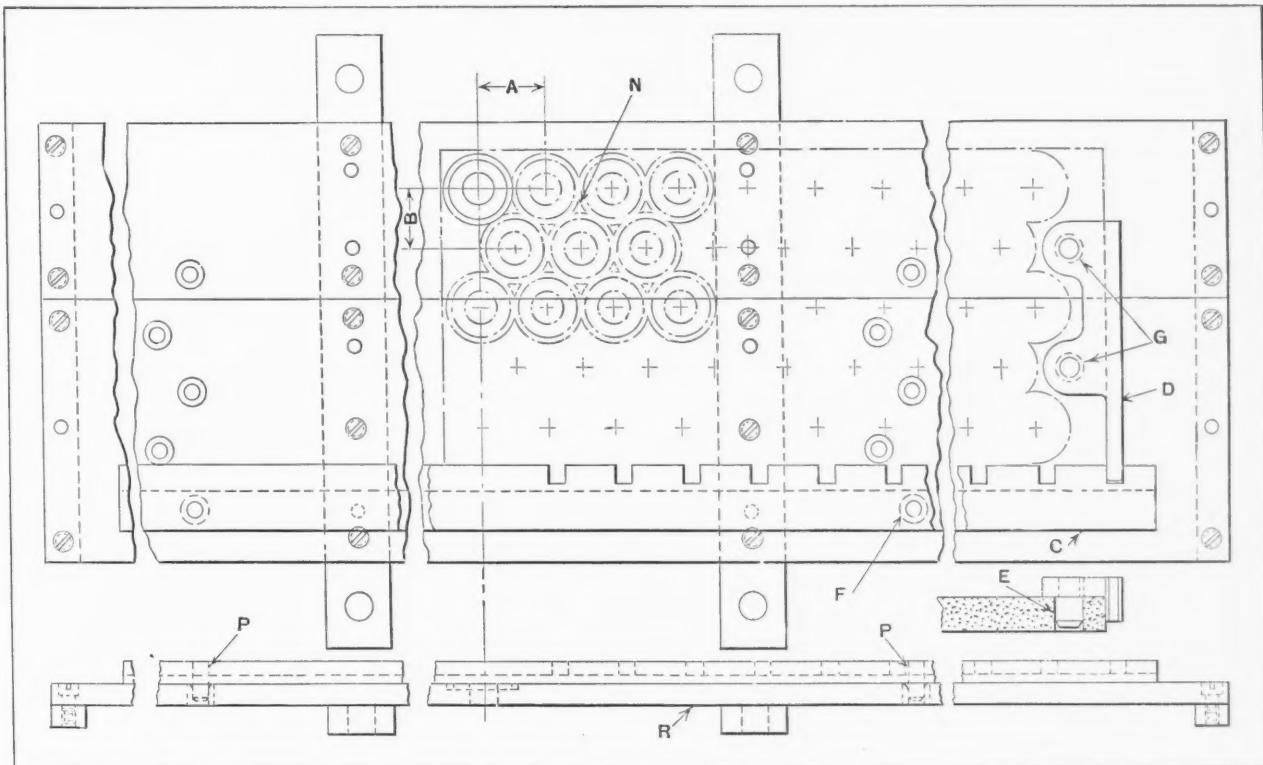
Fixture for Holding and Indexing Fabric Sheet during Trepanning Operation
